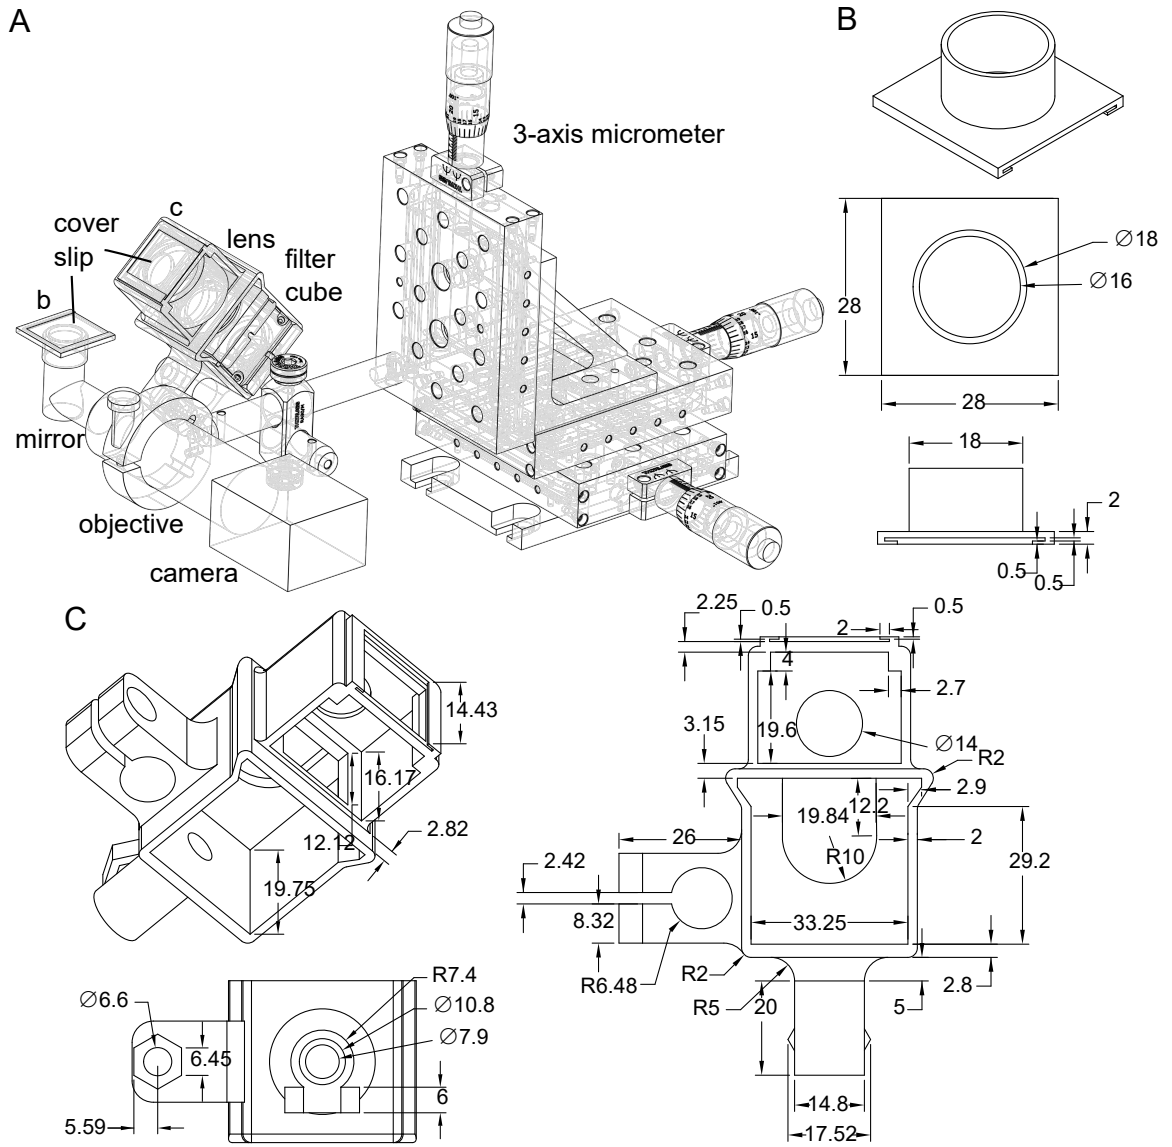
Imaging assembly. Dimensions of adapters are shown in mm.
